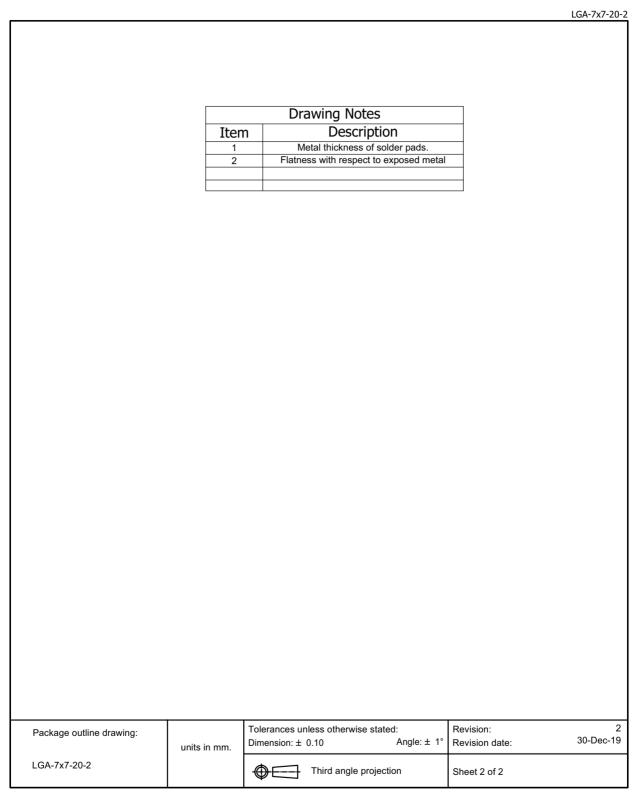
Package outline LGA-7x7-20-2 (sheet 2 of 2)
